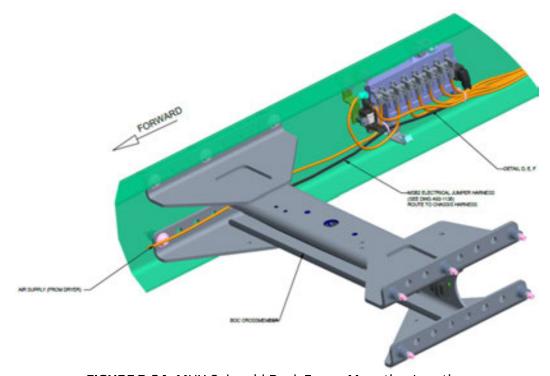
MUX Solenoid Bank Frame Mounting Location
